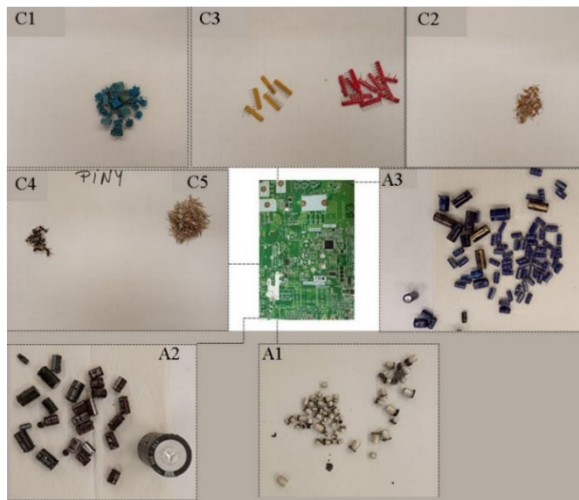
Disassembled electronic workgroups categorised by type, shape and size
